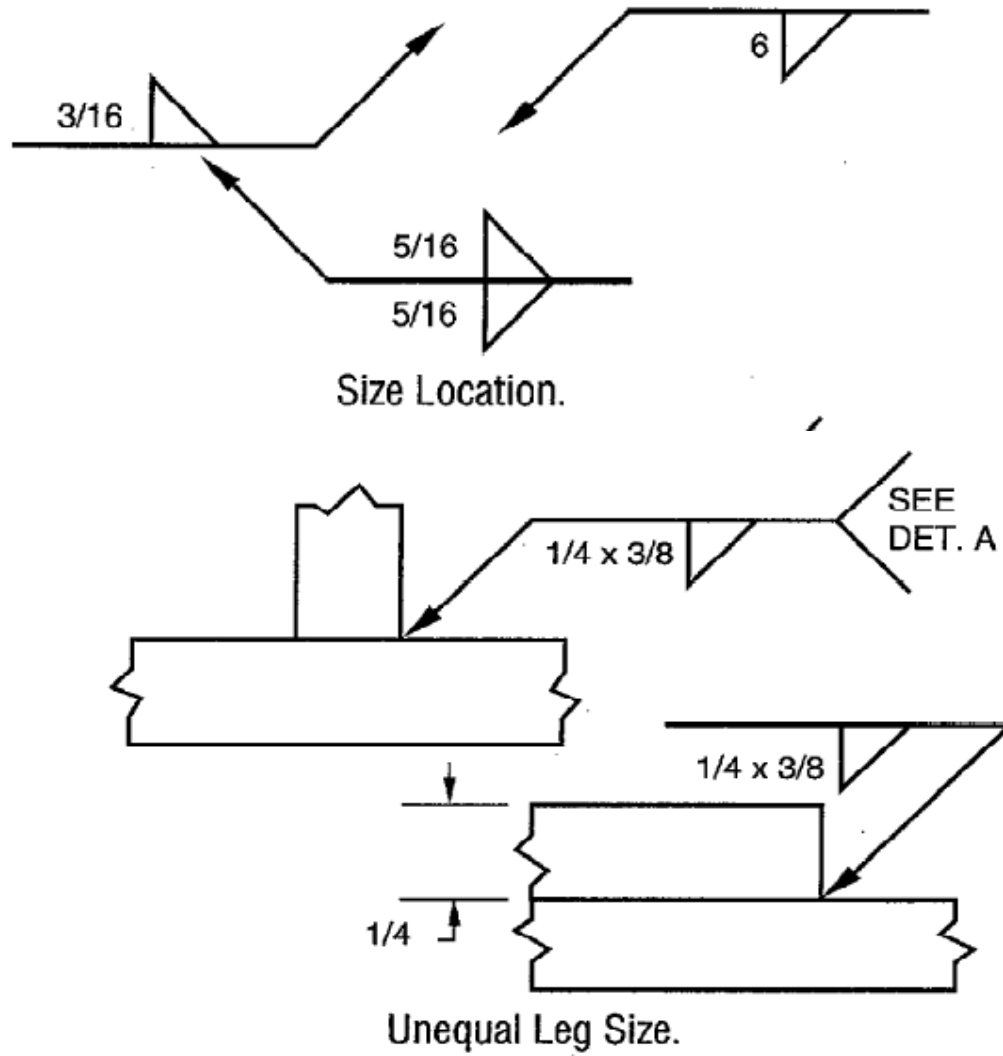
Size—Unequal Leg Fillet Welds
